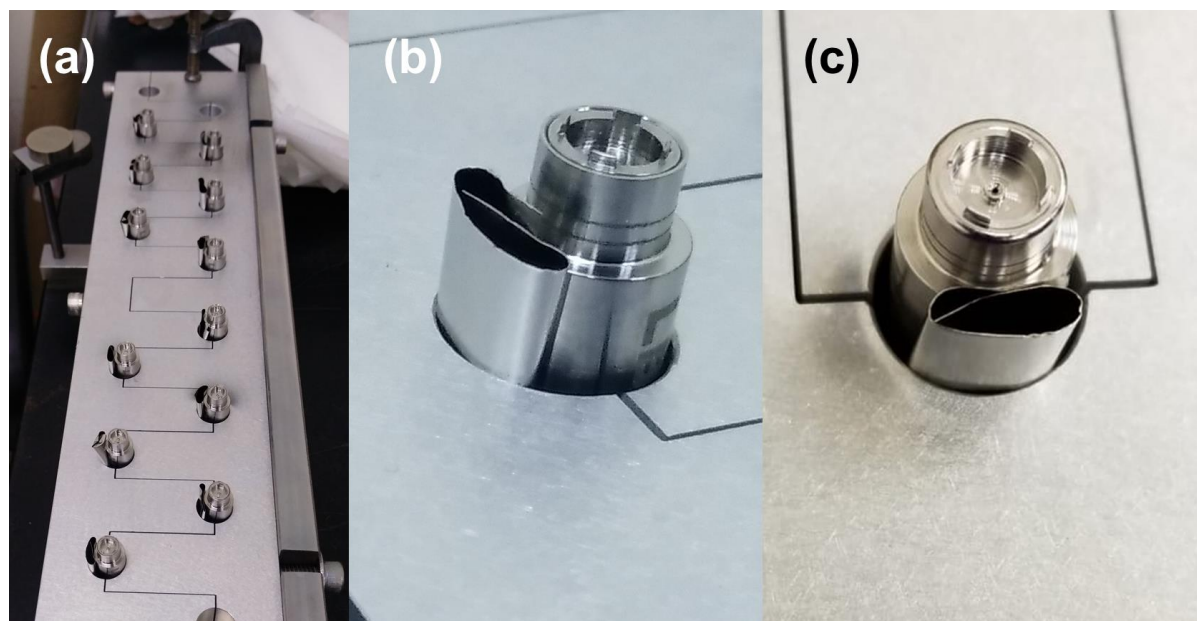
All 12 capsules prepped for electron beam welding (a); close-up views of a single capsule before (b) and after (c) welding.
